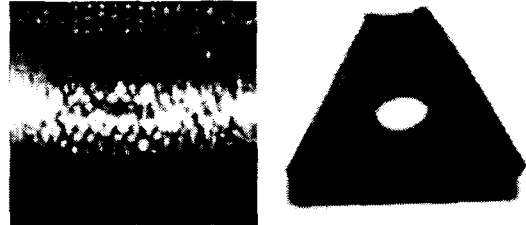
Photograph of chattering specimen and damaged cermet tip
